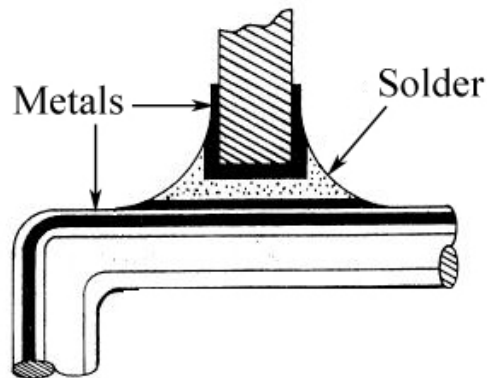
Solder used to joint metallic parts together (Manko, 1979)
